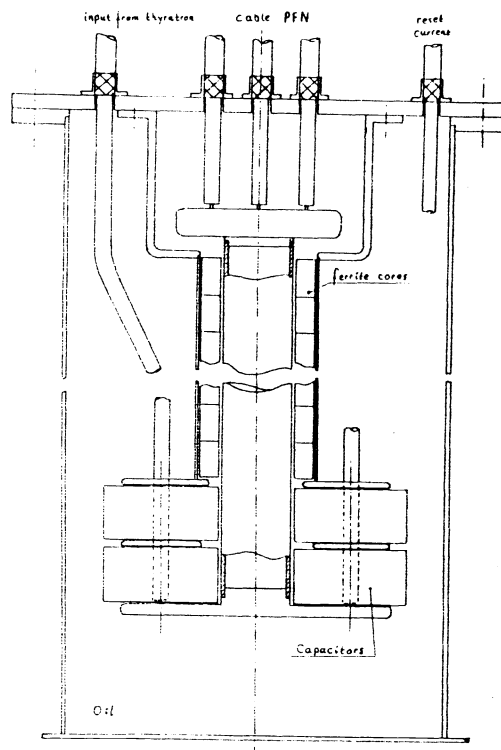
Cross-section of the pulse compressor showing C_1 , the ferrite ring cores and the cables to the load.
